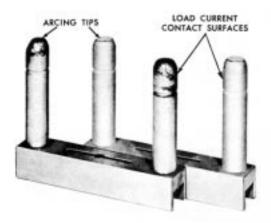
Left: moving contact assembly after one full duty cycle; right; contact assembly new.
